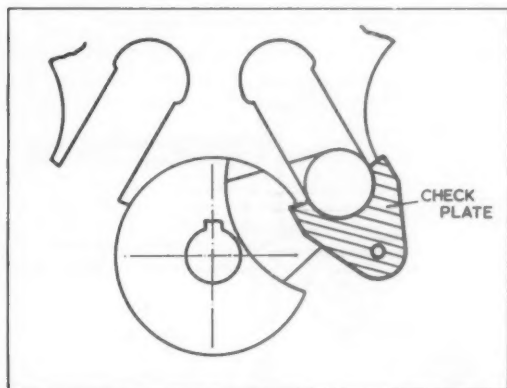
Checking plate when Geneva wheel drive is used in the design and for locating the zero position on the cam chart. At this position the keyways, grub screws or taper pins securing the cams should be all in line at some definite orientation
